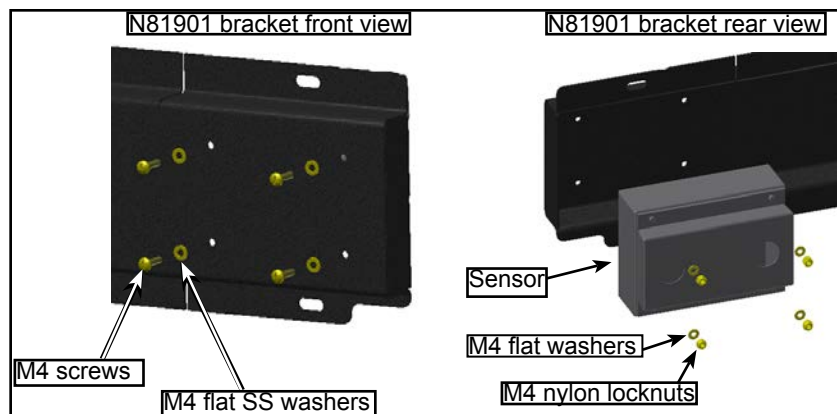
Sensor Installation on the N81901 Bracket with Retained Hardware
